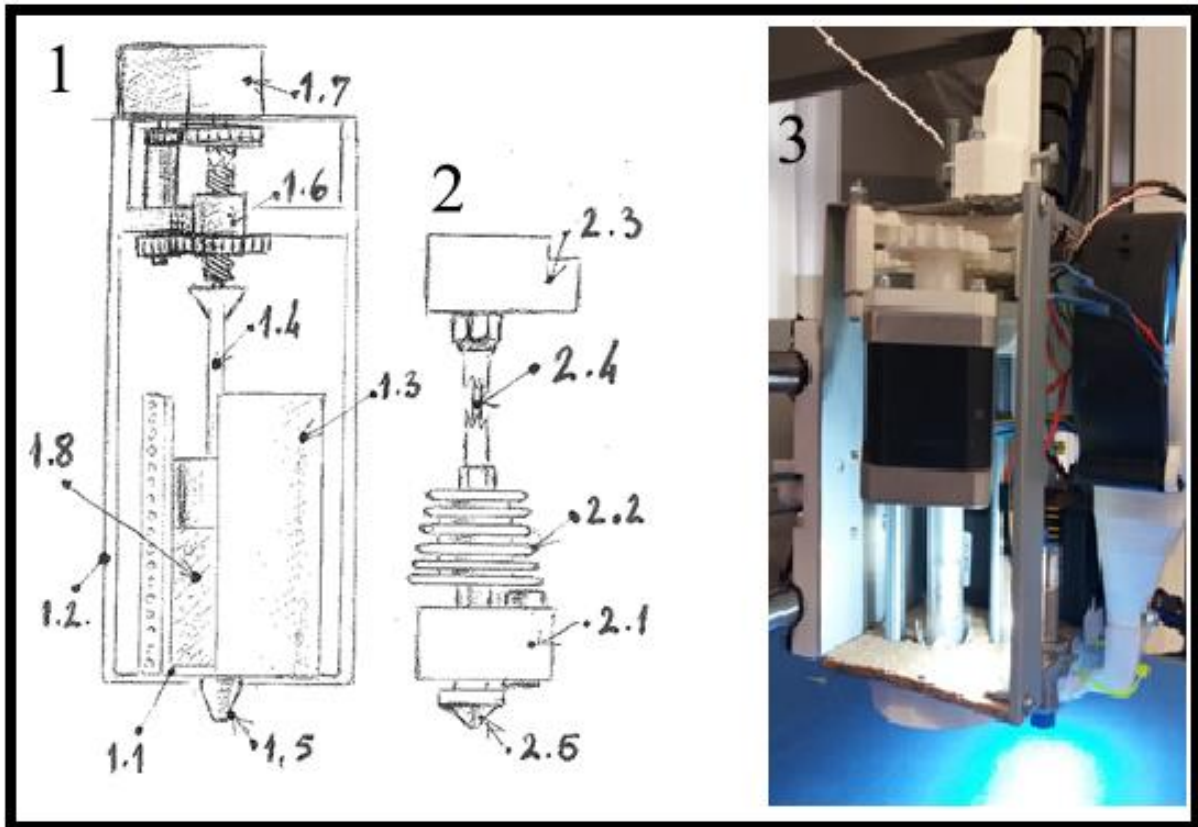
Schematic representation of the extruder design in custom made laboratory 3D printer: from technical reasons, 3D printer was modified to include two extruders: 1 – syringe extruder, 1.1 – glass syringe, 1.2 – external frame of the extruder 1, 1.3 – electrical heater coil, 1.4 –metal piston of the syringe, 1.5 – syringe nozzle (0,8mm in diameter), 1.6 – gears of the piston drive, 1.7 – piston drive motor with reduction, 1.8 – HAP PLA mixture, 2 – PLA extruder, 2.1 – heater block of the PLA extruder, 2.2 – extruder cooler, 2.3 – PLA extruder motor drive with reduction, 2.4 – PLA filament 1.75mm in diameter, 2.5 – PLA extruder nozzle 0,4mm in diameter. 3 - paste extruder attached to the head of the printer, with removed electrical heater coil, so the syringe with the metal piston can be visible.
